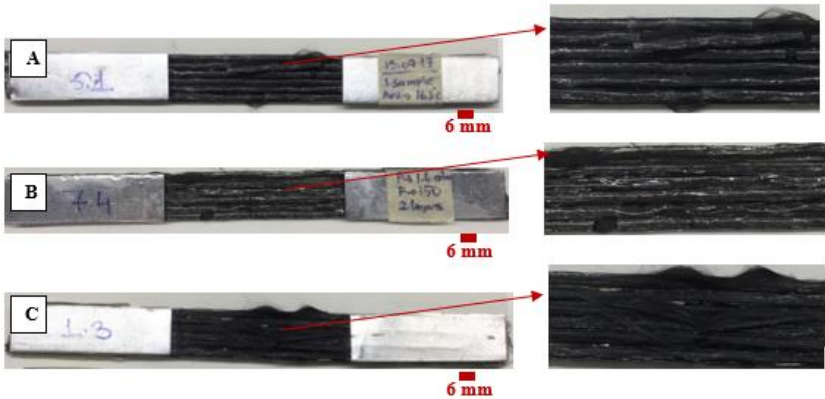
Tensile tested carbon fiber reinforced PLA samples’ fractures. (A) PLA cracks on surface and fibers are damaged, (B) PLA fractures and fiber pull-outs on the sides, and (C) fiber explosion.
